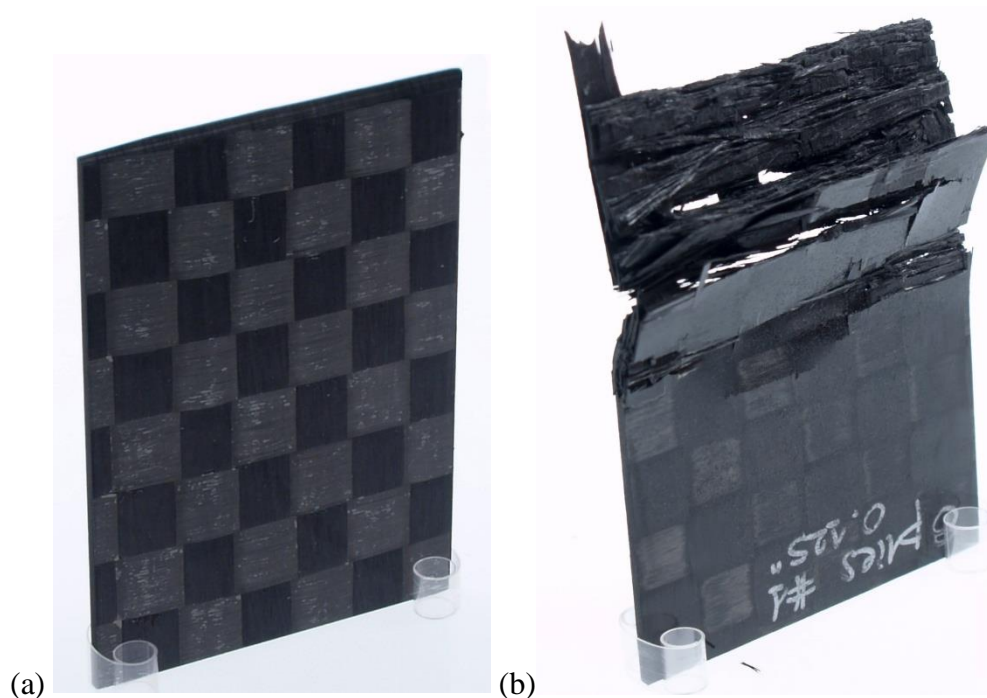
Flat crush coupons (a) tape lay-up before and (b) fabric lay-up after crush testing.
